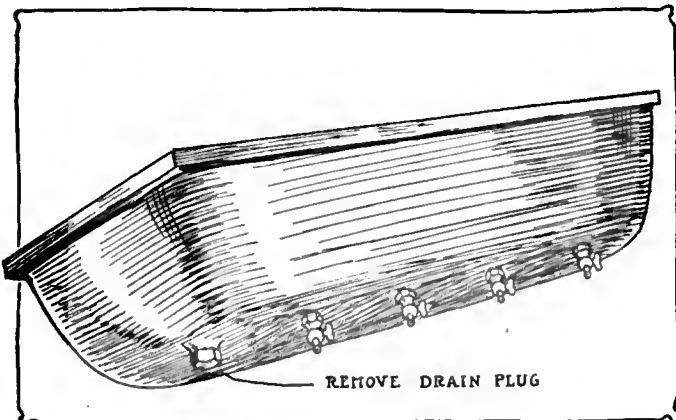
Petcocks on the bottom of the crankcase should be opened and the drain plug removed to clean out the old oil
